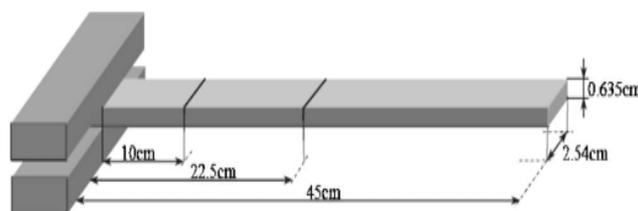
Cantilever Aluminium Beam Specimen with Two Cuts
